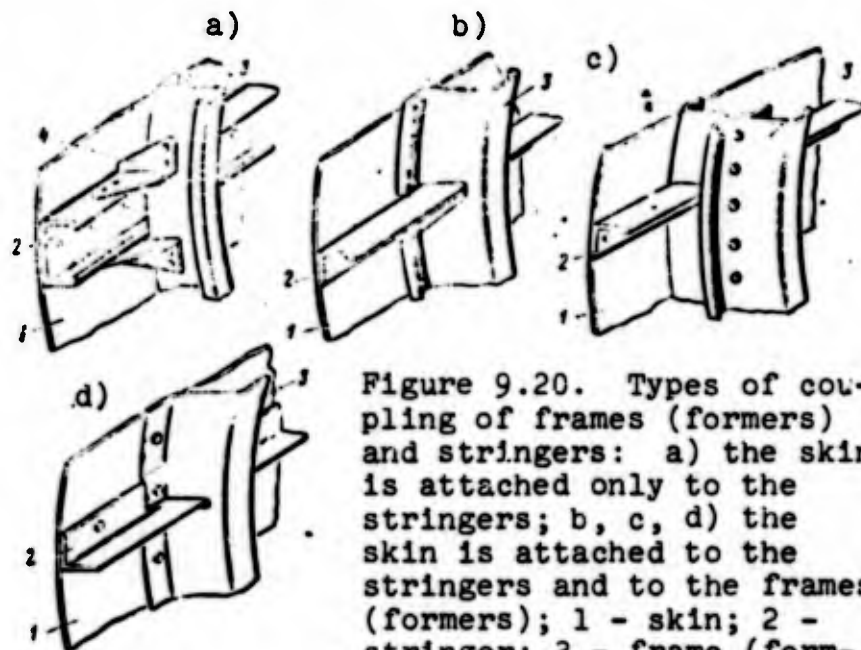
Types of coupling of frames (formers) and stringers: a) the skin is attached only to the stringers; b, c, d) the skin is attached to the stringers and to the frames (formers); 1 - skin; 2 - stringer; 3 - frame (former); 4 - fitting (technological compensator).
